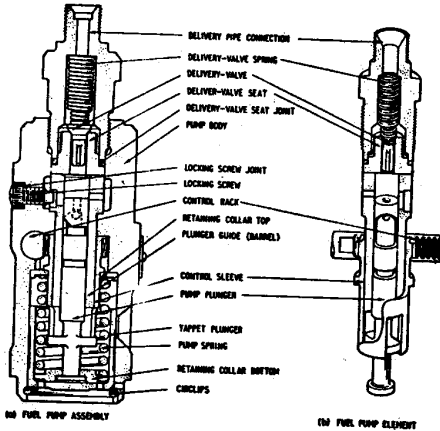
Details of construction the RUSTON & HORNBSBY FP type fuel injection pump. (a) Fuel pump assembly in cross section. (b) Part sectional view of the fuel pump element.
